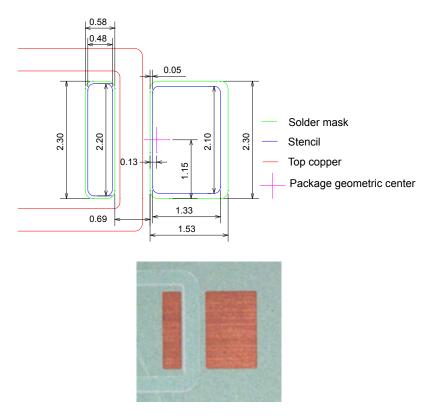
Recommended PCB footprint design for the LUXEON emitter (top). In order to ensure proper heat dissipation from the package electrodes to the PCB, it is best to extend the top copper layer of the PCB several millimeters beyond the package of the LUXEON emitter. See Section 3 for more information on the copper layout.
